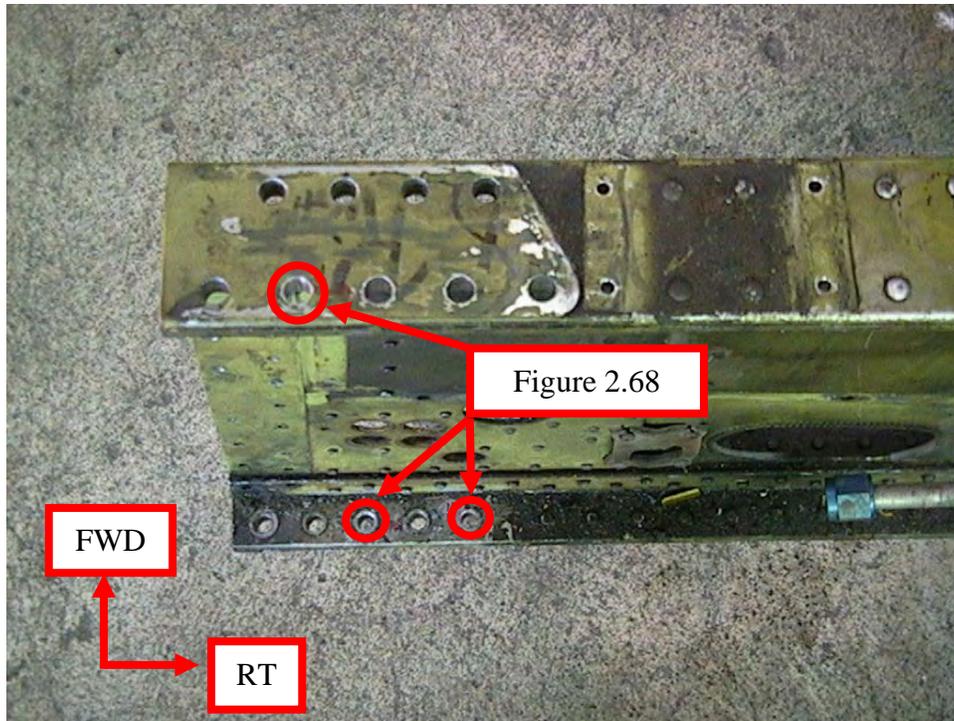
Right Wing Main Spar Splice Lower Surface Attachment Points BL 0 Through BL 6
